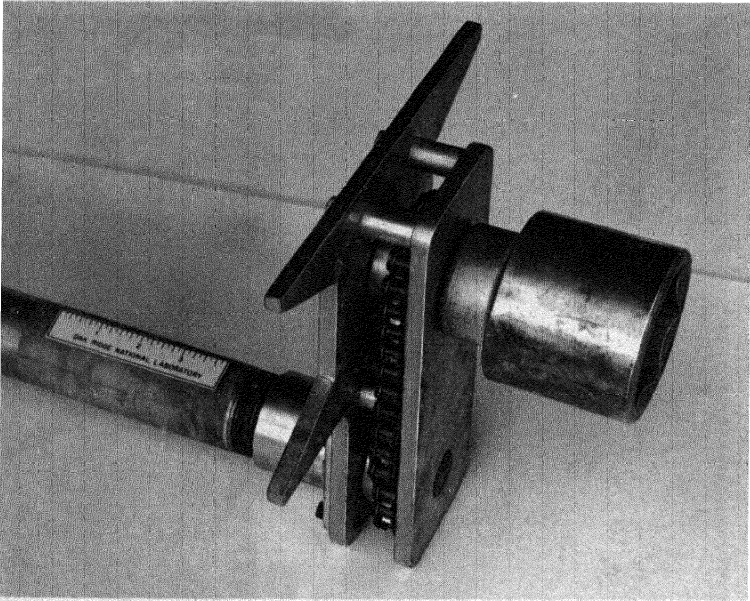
Spinner wrench for rapid removal of HRE-2 flange bolts.
